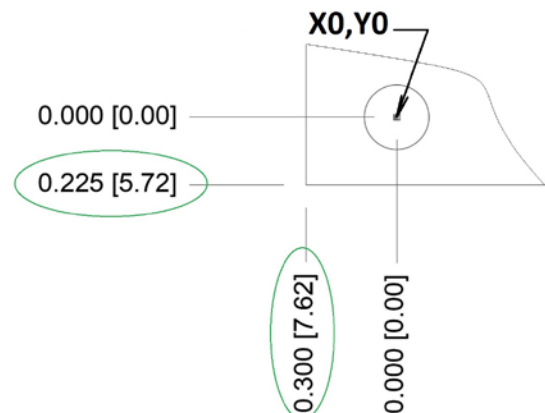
The X and Y locate the board outline with relative tolerance to the hole pattern.
